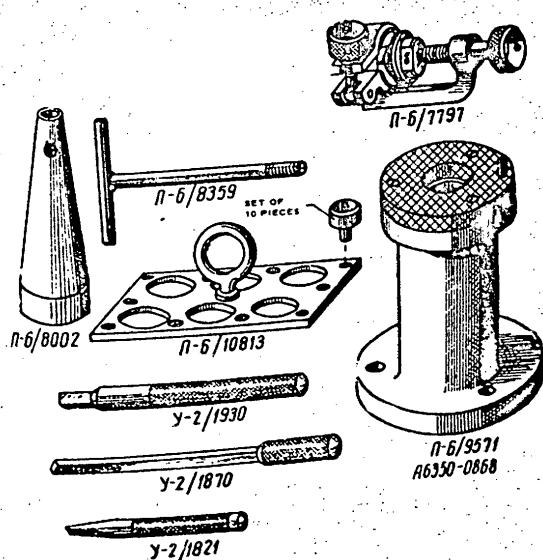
TOOLS AND FIXTURES FOR SUPERCHARGER ASSEMBLY
